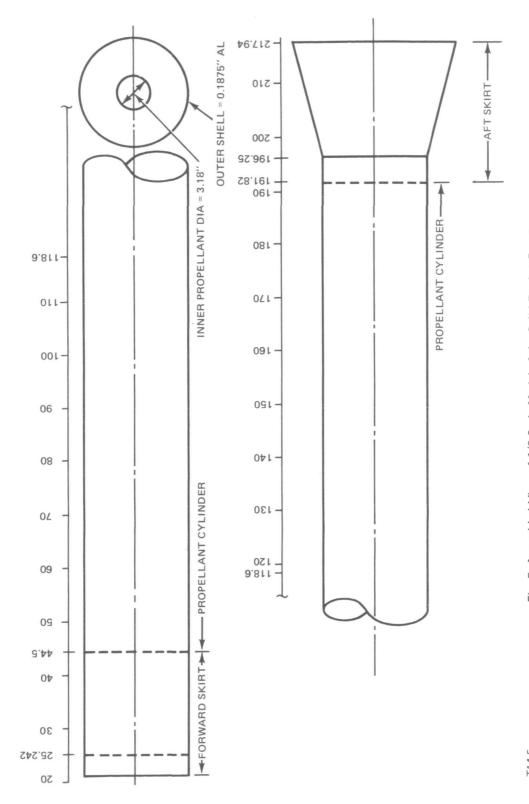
Assembled View of 1/8-Scale Model of the Solid Rocket Booster
